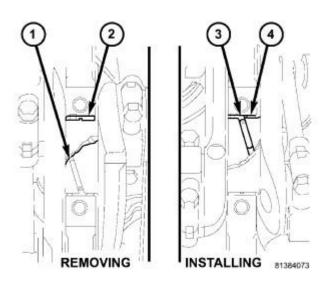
Main Bearing Cap Identification & Bolts Courtesy of CHRYSLER LLC
